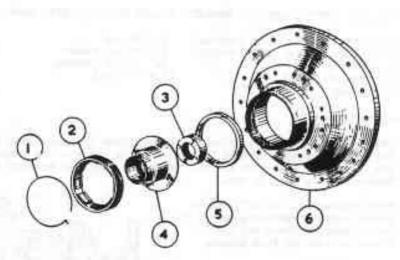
L.H. SIDE PLATE ASSEMBLY.
